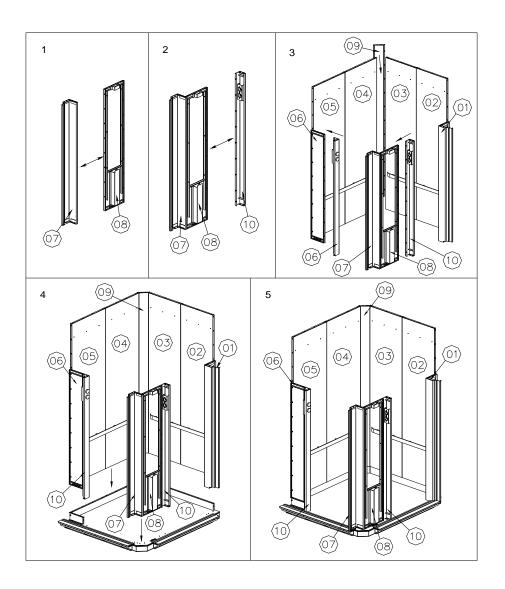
C. CAR PANEL(REAR) ASSEMBLY (CORNER POST)
